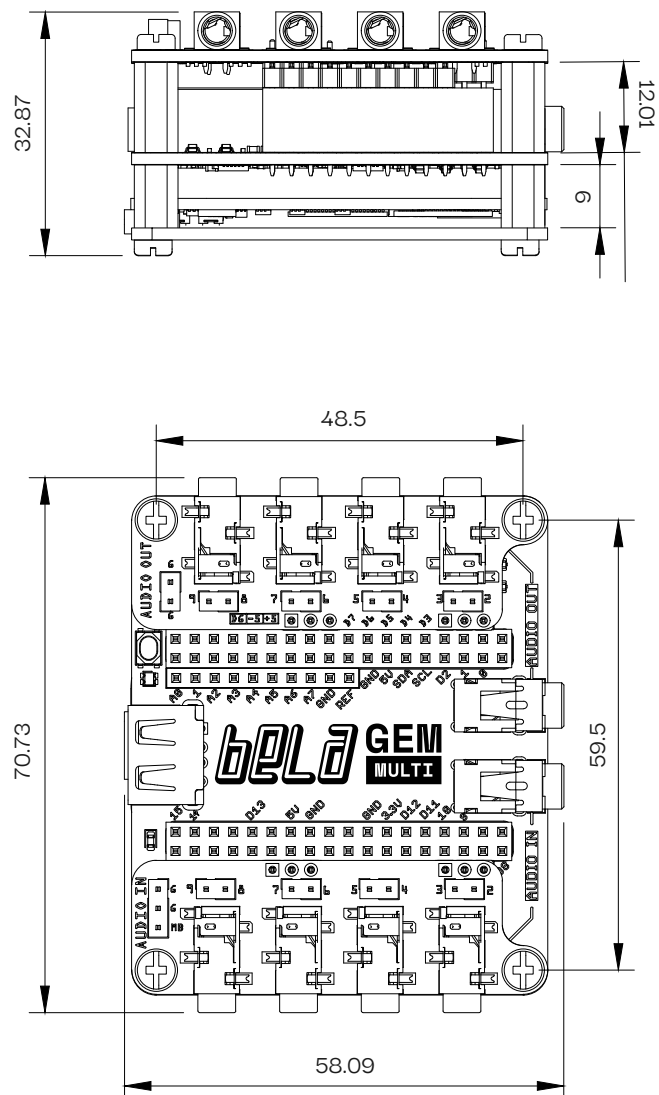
Bela Gem Multi dimensions (with audio extension boards installed)
